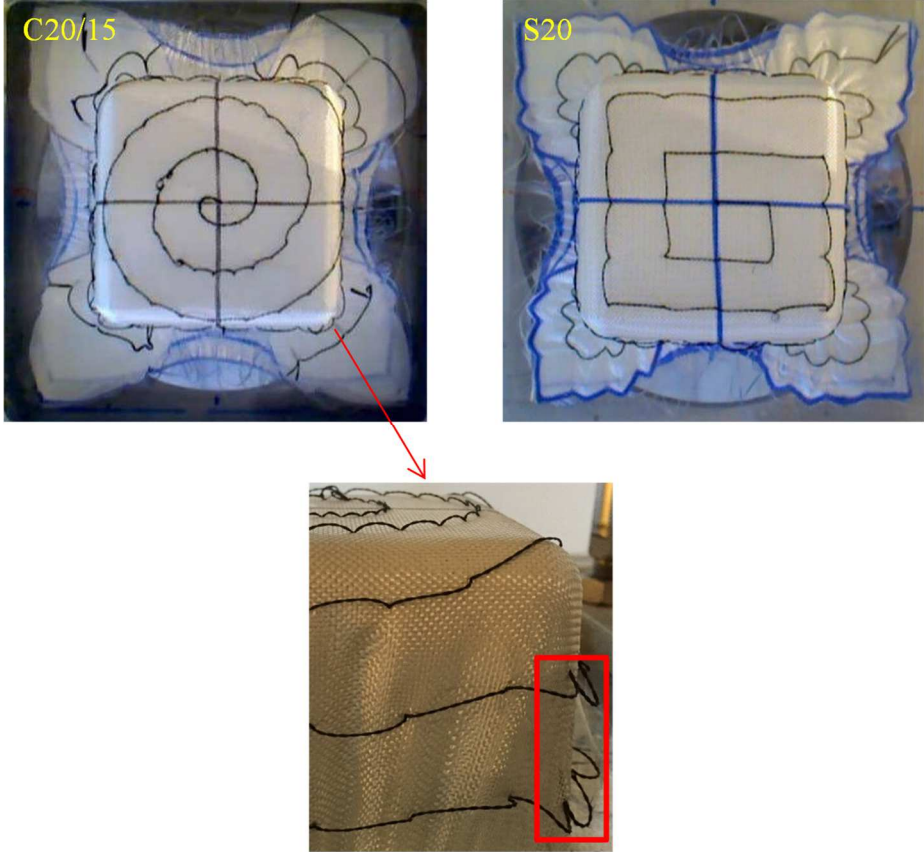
The out-of-plane defects during in the tufted preforms forming.
